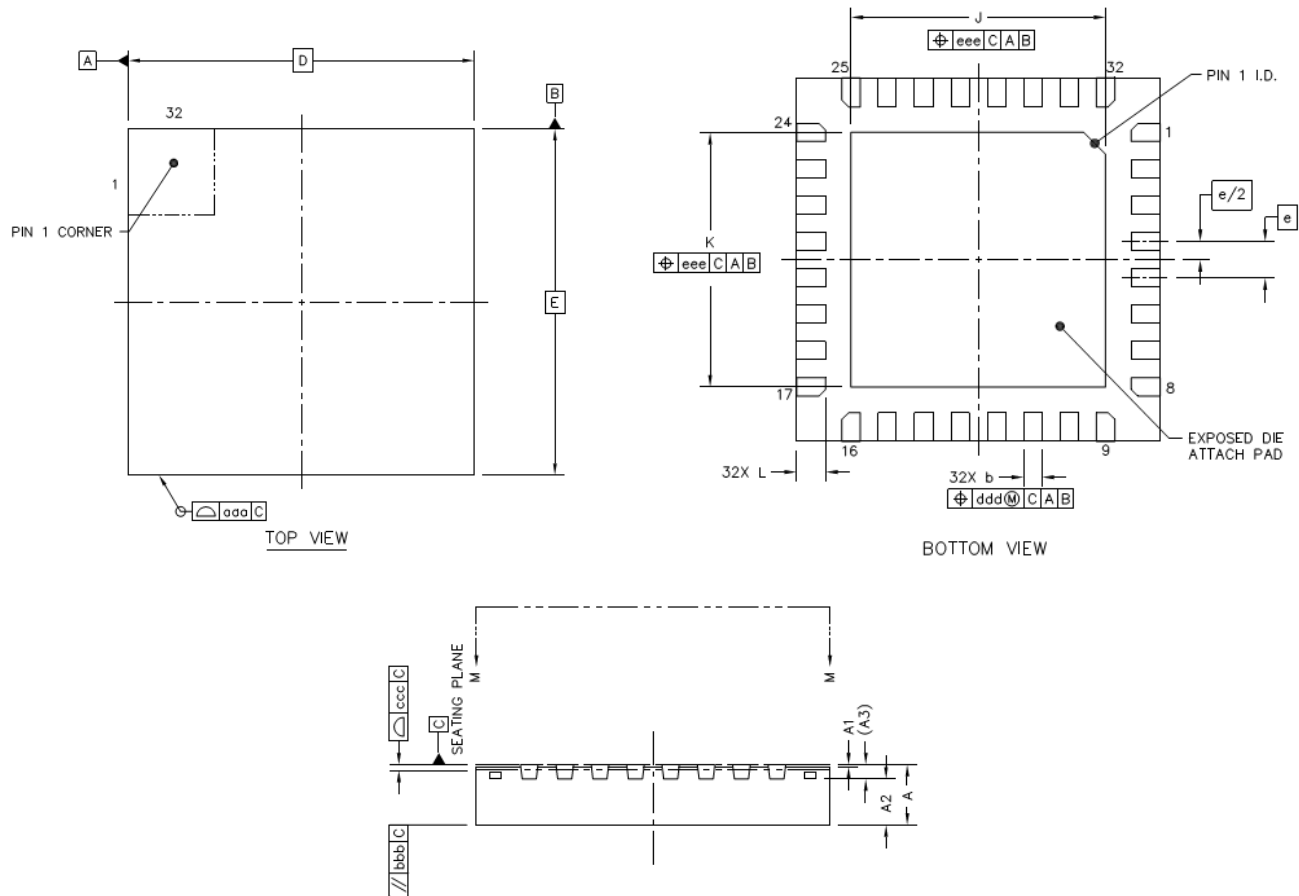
Top, Bottom and Side View of iM501 QFN Package
